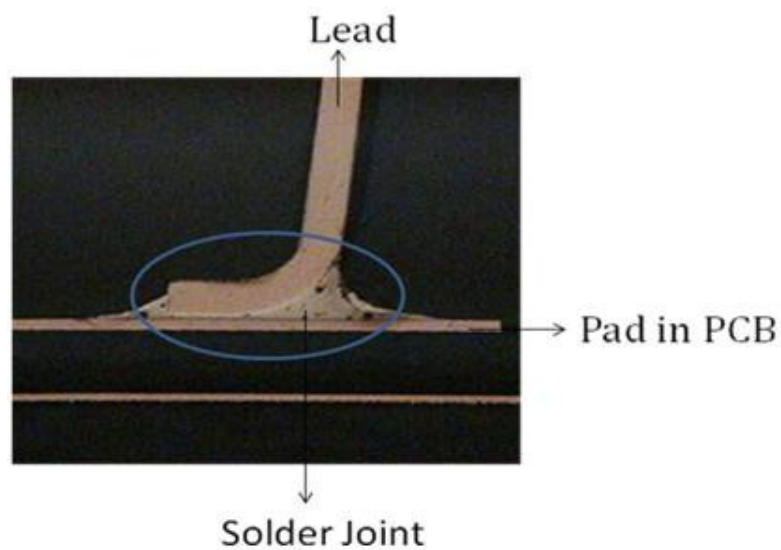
A close-up view of the solder joints in lead frame based packages
